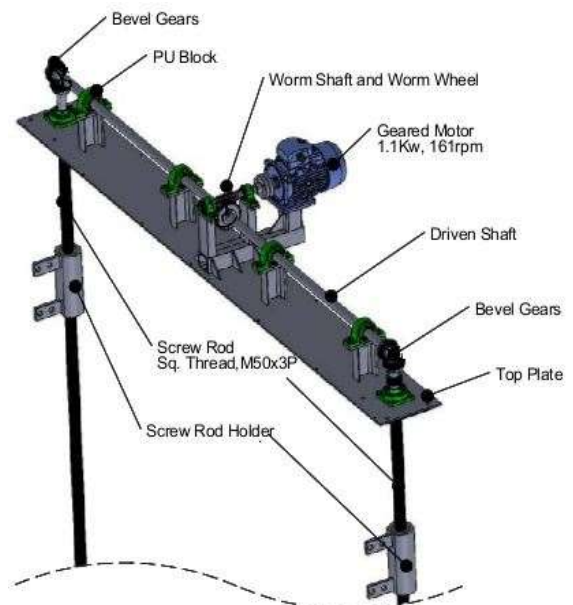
Screw Rod driven by Bevel Gears, Worm and Worm Wheel coupled to Motor
